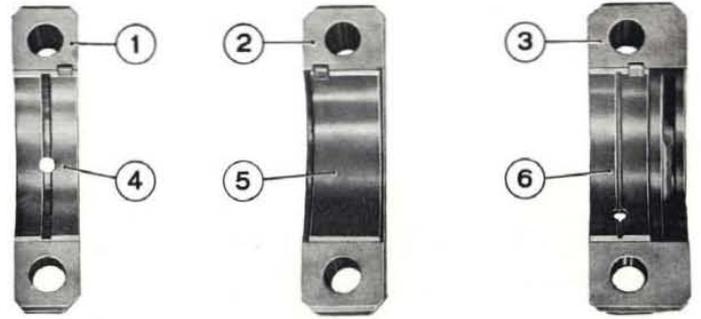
Main bearing caps with bearing inserts in place. 1. Front cap. - 2. Intermediate cap. - 3. Rear cap. - 4, 5, 6. Bearing inserts.
